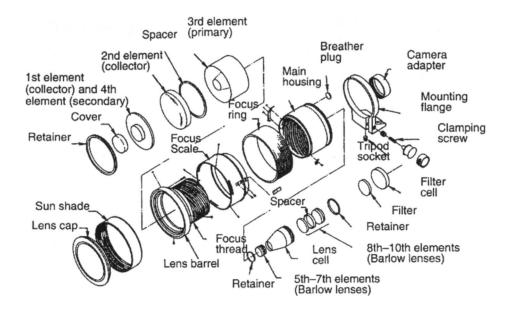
Exploded view of the solid catadioptric lens assembly. (Courtesy of Goodrich Corporation, Danbury, CT.)
